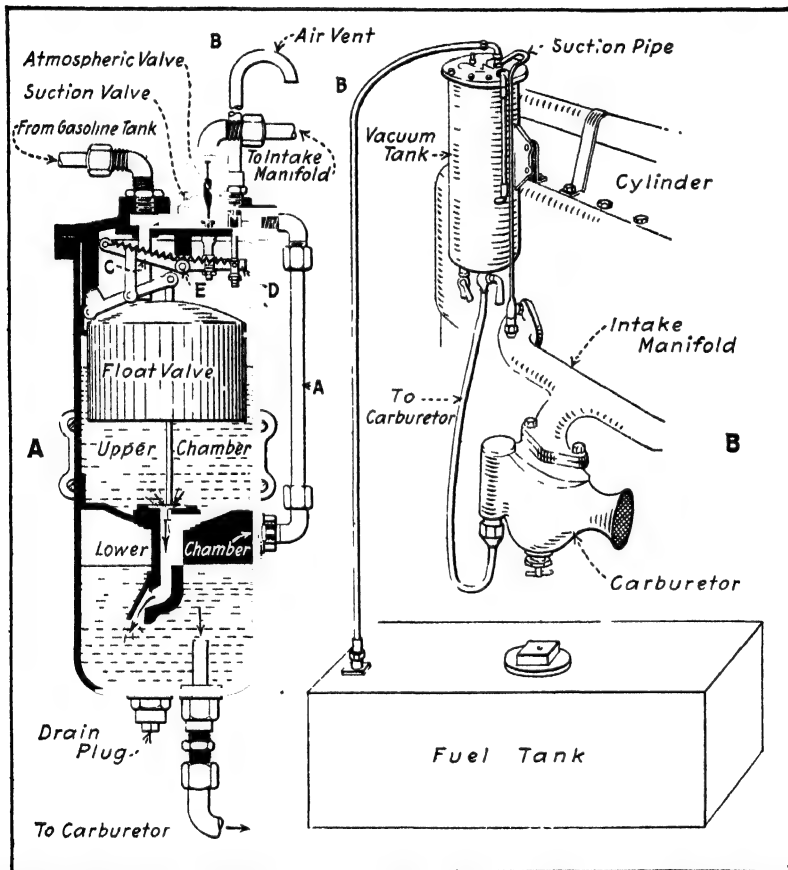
The Stewart Vacuum Fuel Feed Device Used on Numerous Motor Car Engines.
